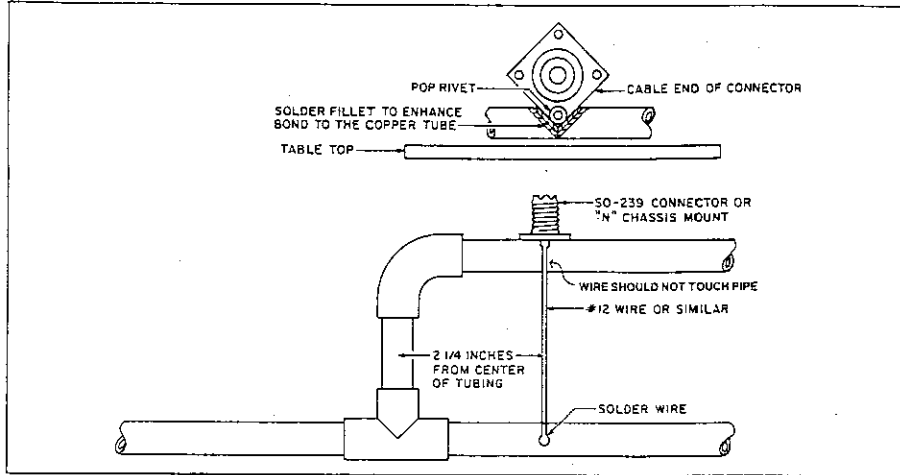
See the materials list. Before soldering, clean the joints and place the assembled antenna on a flat, noninflammable surface. Practice on some scraps of tubing and extra pipe joints if you're new to this. All dimensions are center-to-center.
